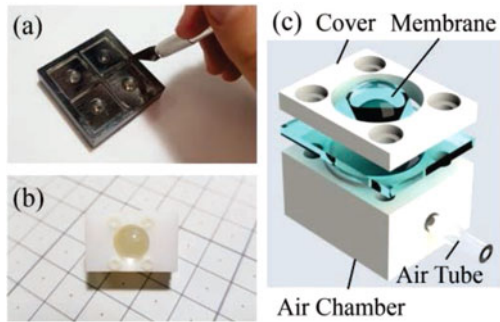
Remote touch tip of the tactile sensing system: (a) elastomer membrane with the mold, (b) assembled sensor unit, and (c) schematic of the sensor unit.
